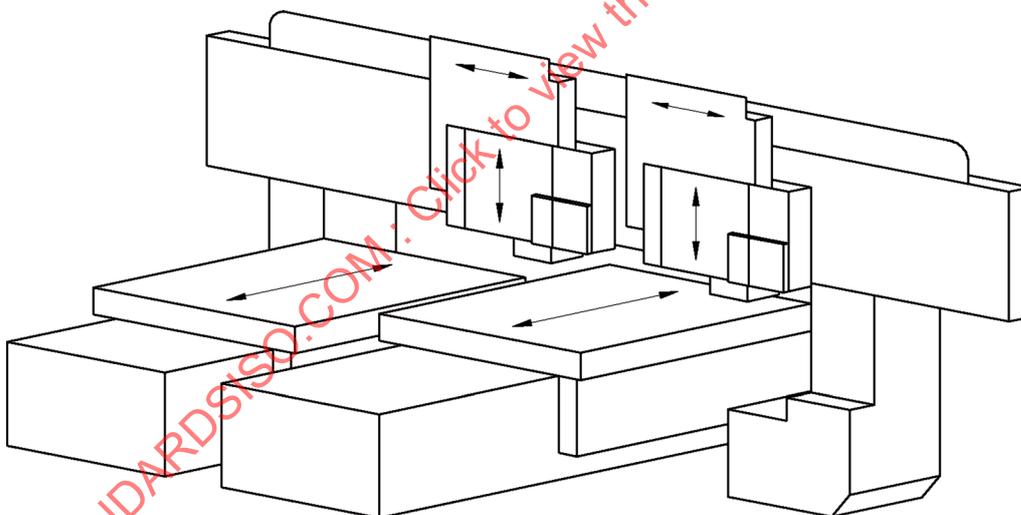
Example of portal frame machine with moving tables, fixed portal, moving machining heads
